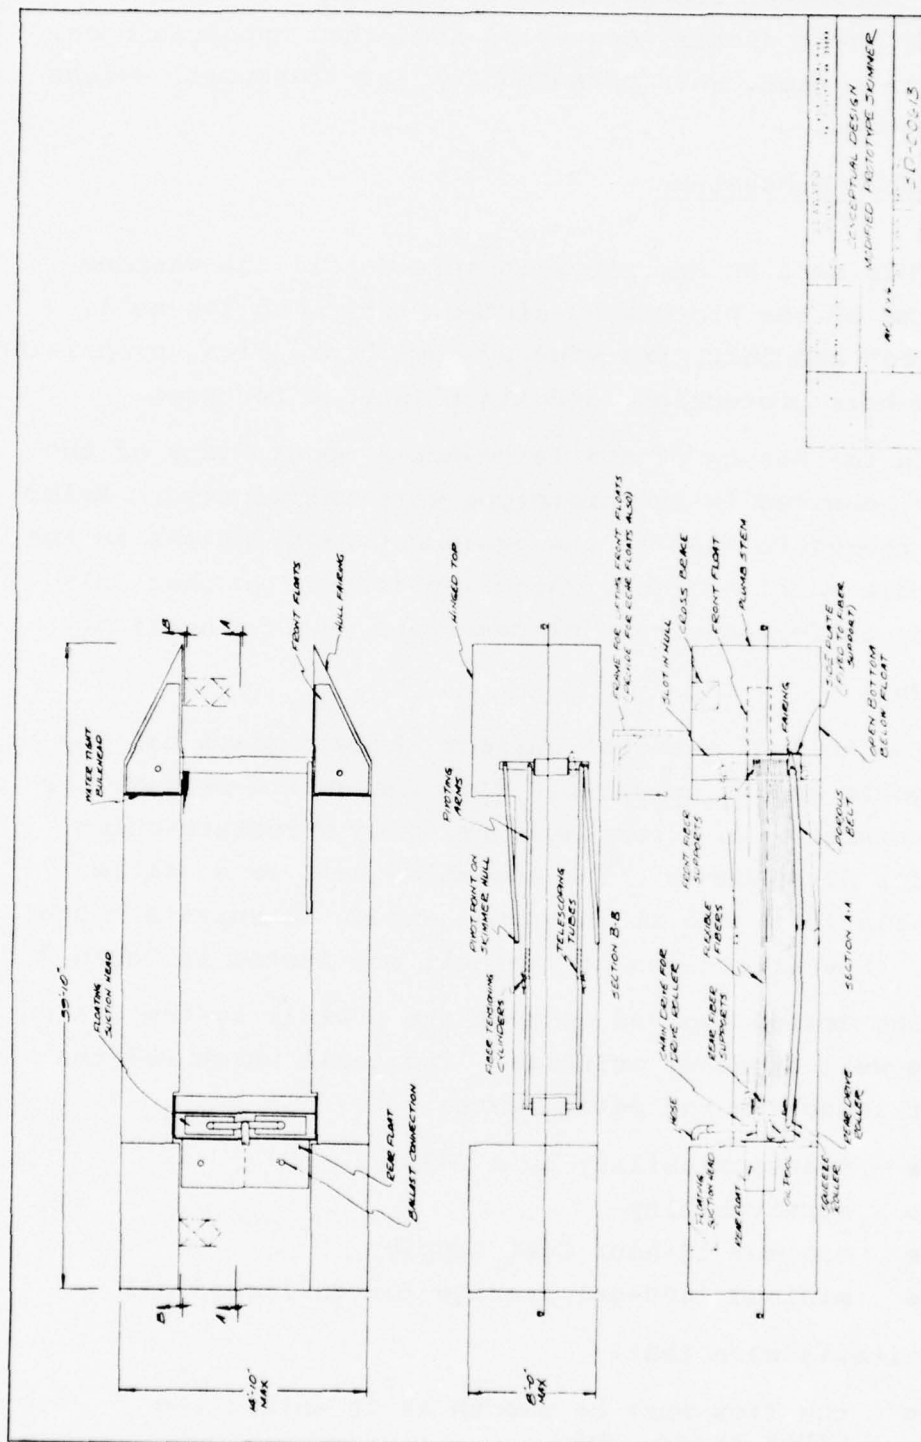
PROTOTYPE SKIMMER - MODIFIED DESIGN
